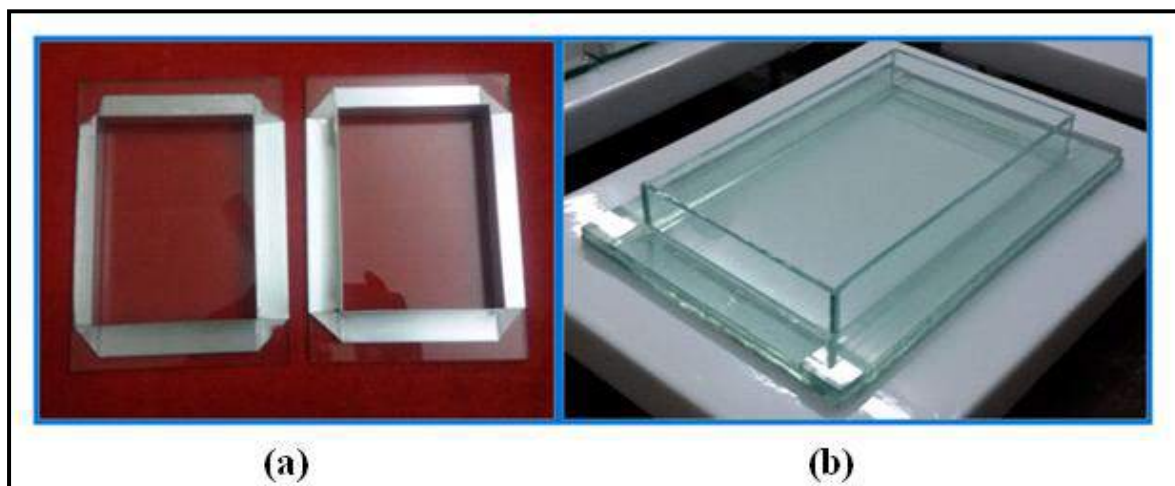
(a) Small glassy mold, (b) Large glassy mold.
